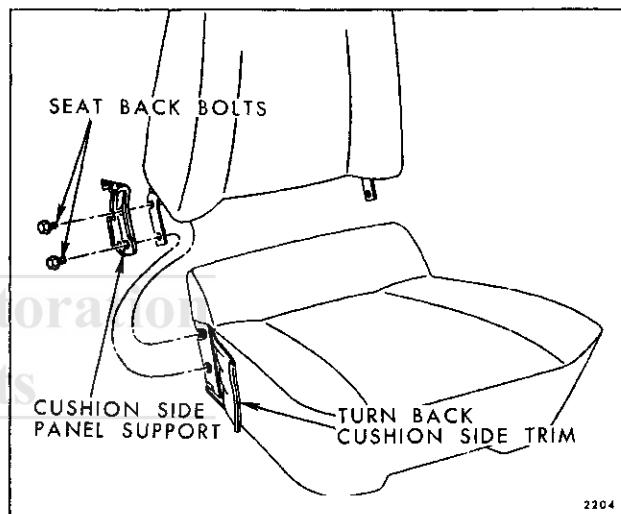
Bucket Seat Back Removal (Without Reclining Seat Back) — All Except Corvair
